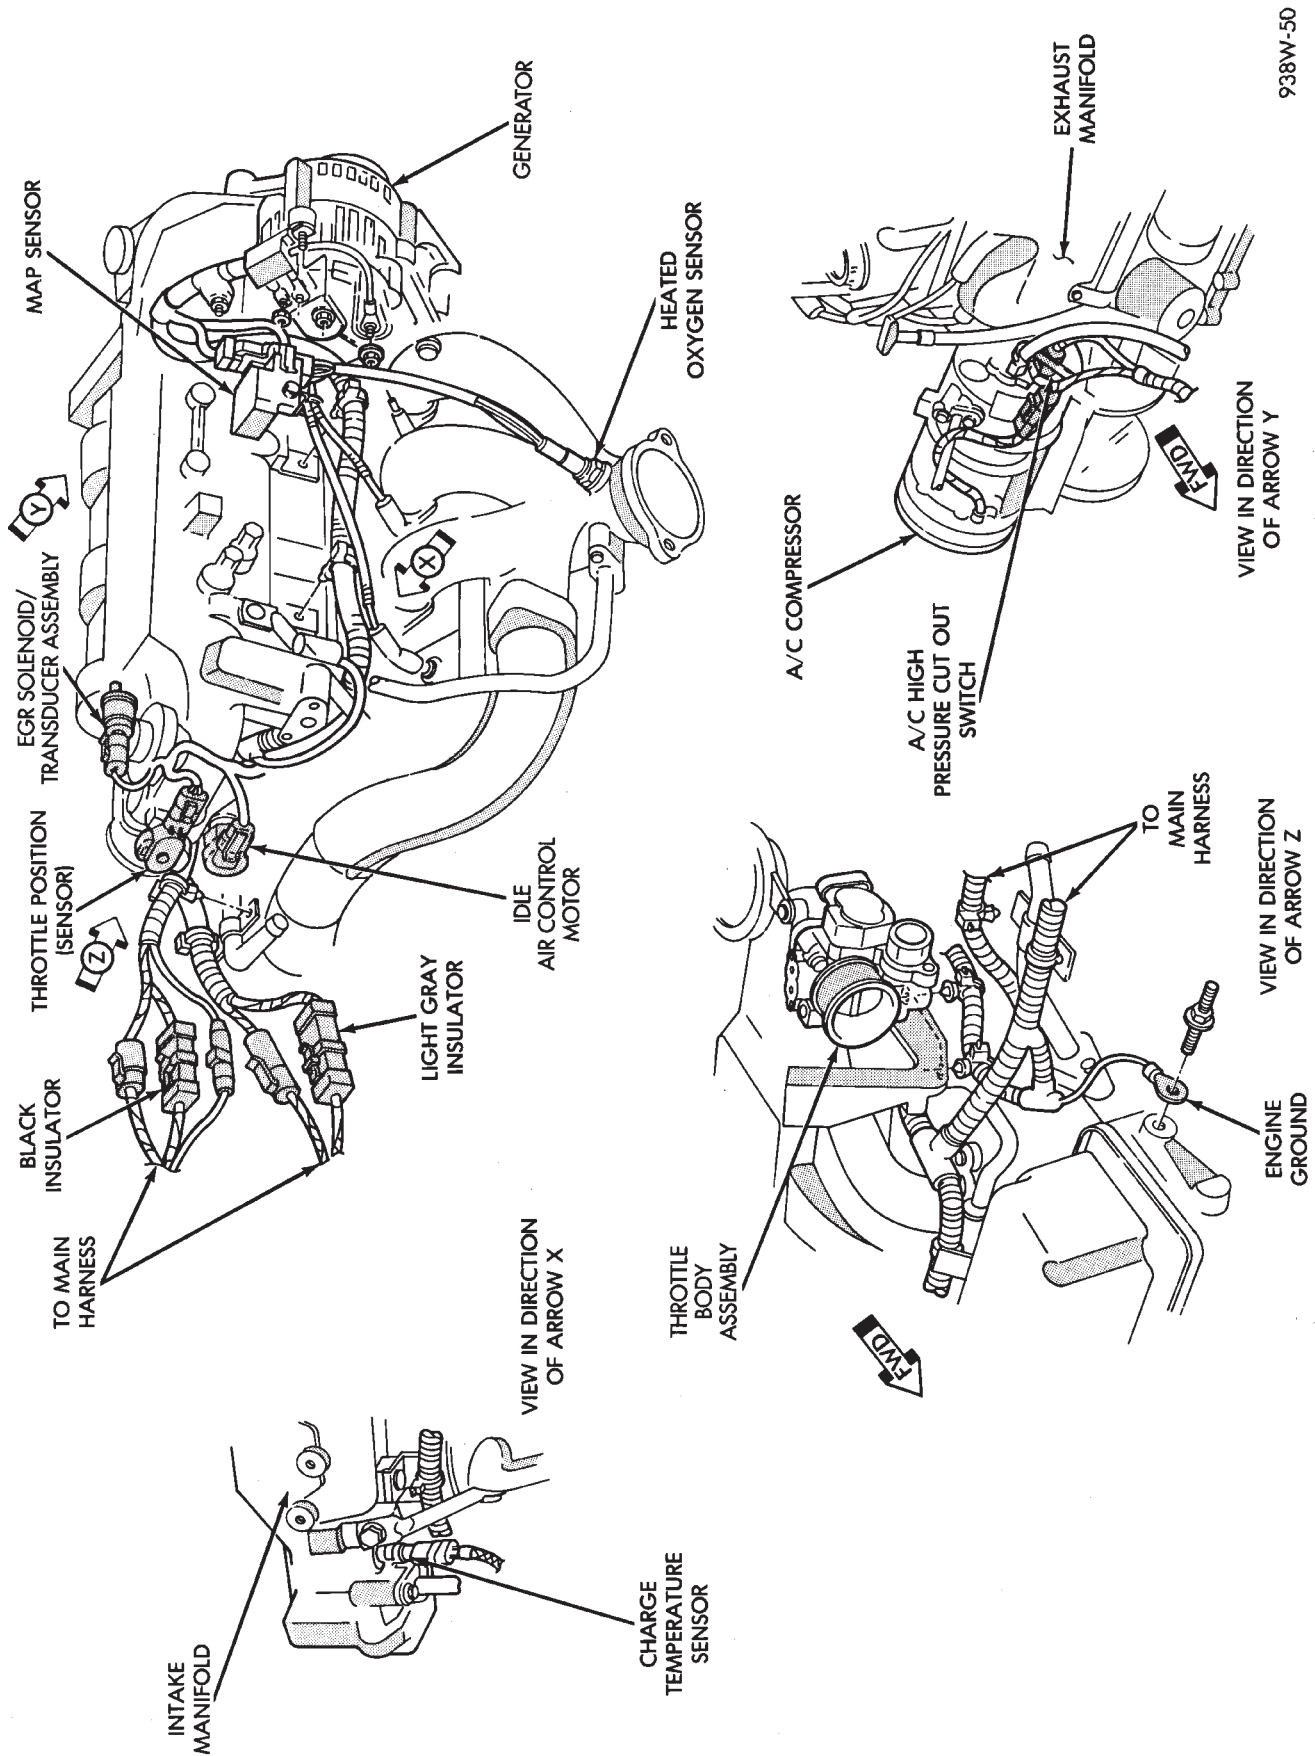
Engine Wiring 3.3L and 3.8L AY Body
